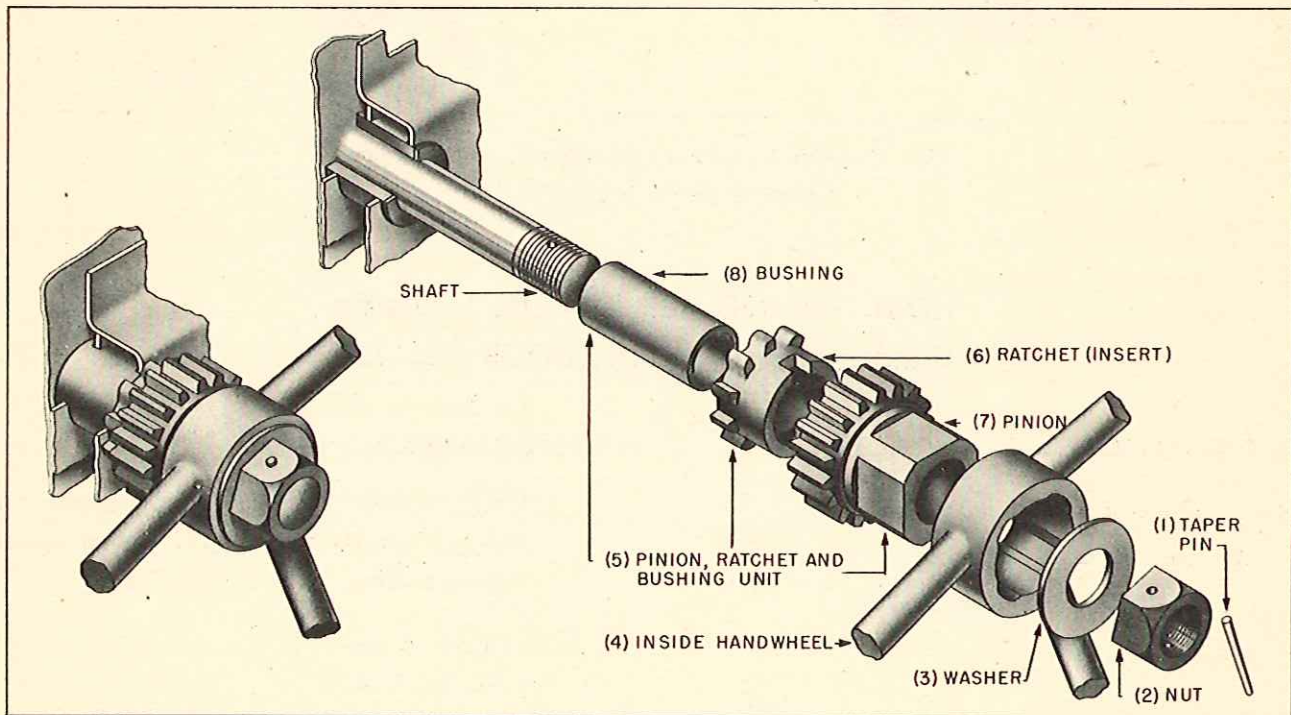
Pinion (inside handwheel), assembly and exploded views, TLD-2(crs) door.
